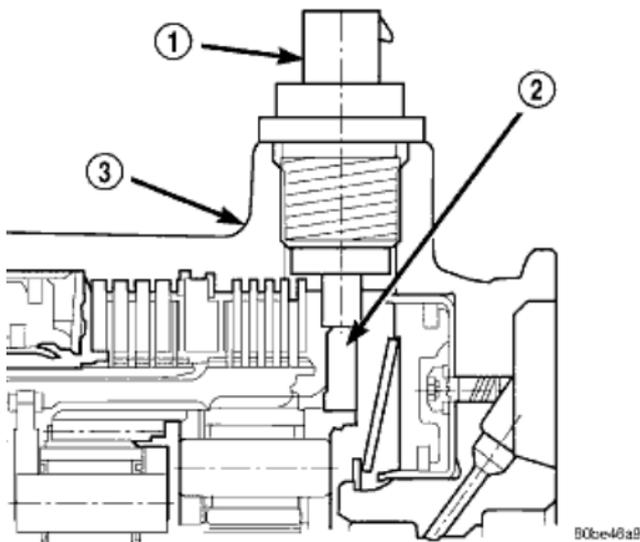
Identifying Output Speed Sensor & Rear Planet Carrier/Output Shaft Assembly
